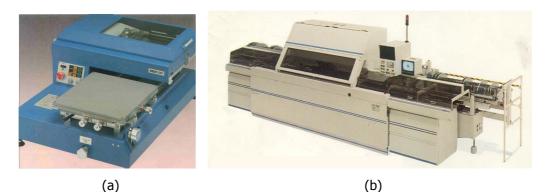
(a) DEK 247 Semi-automatic dispenser (b) Universal 4785 HSP high-speed placer
